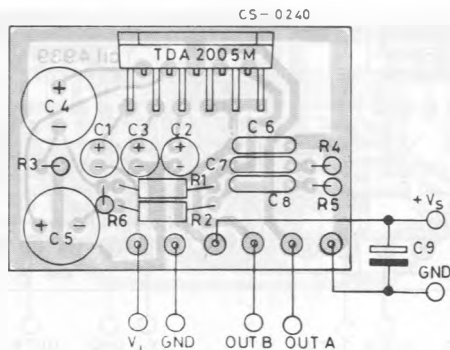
P.C. board and component layout of the circuit of Fig. 23 (1 : 1 scale)
